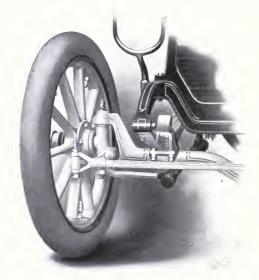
Steering Yoke, Neck, and Knuckle. Packard Motor Car Company, Detroit, Mich.
